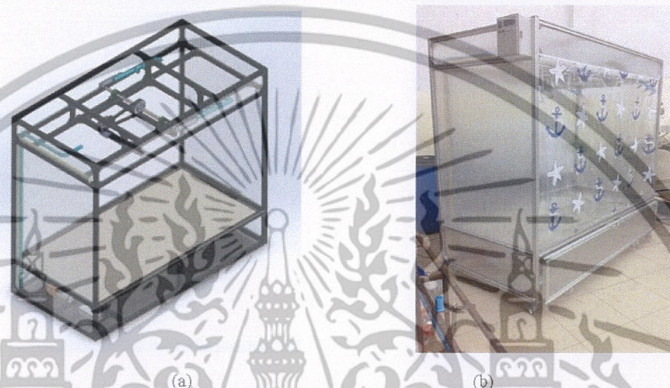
(a) model design of the automatic bicycle washing machine (b) The prototype machine
